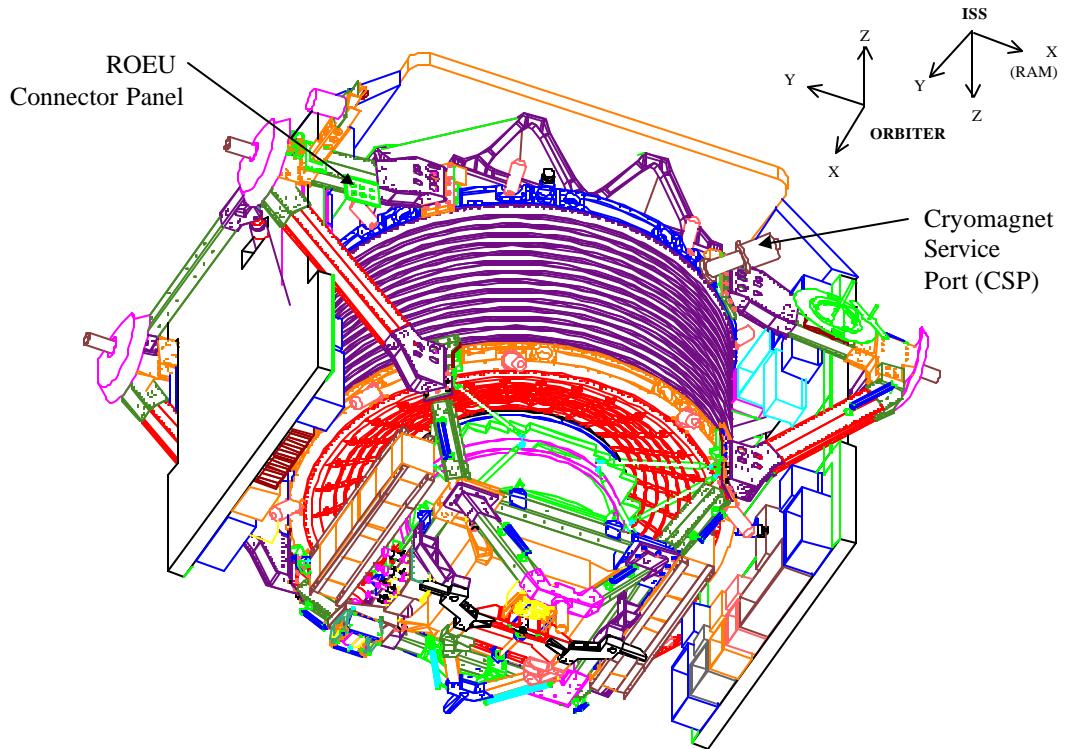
AMS Payload Assembly (4 of 4)
